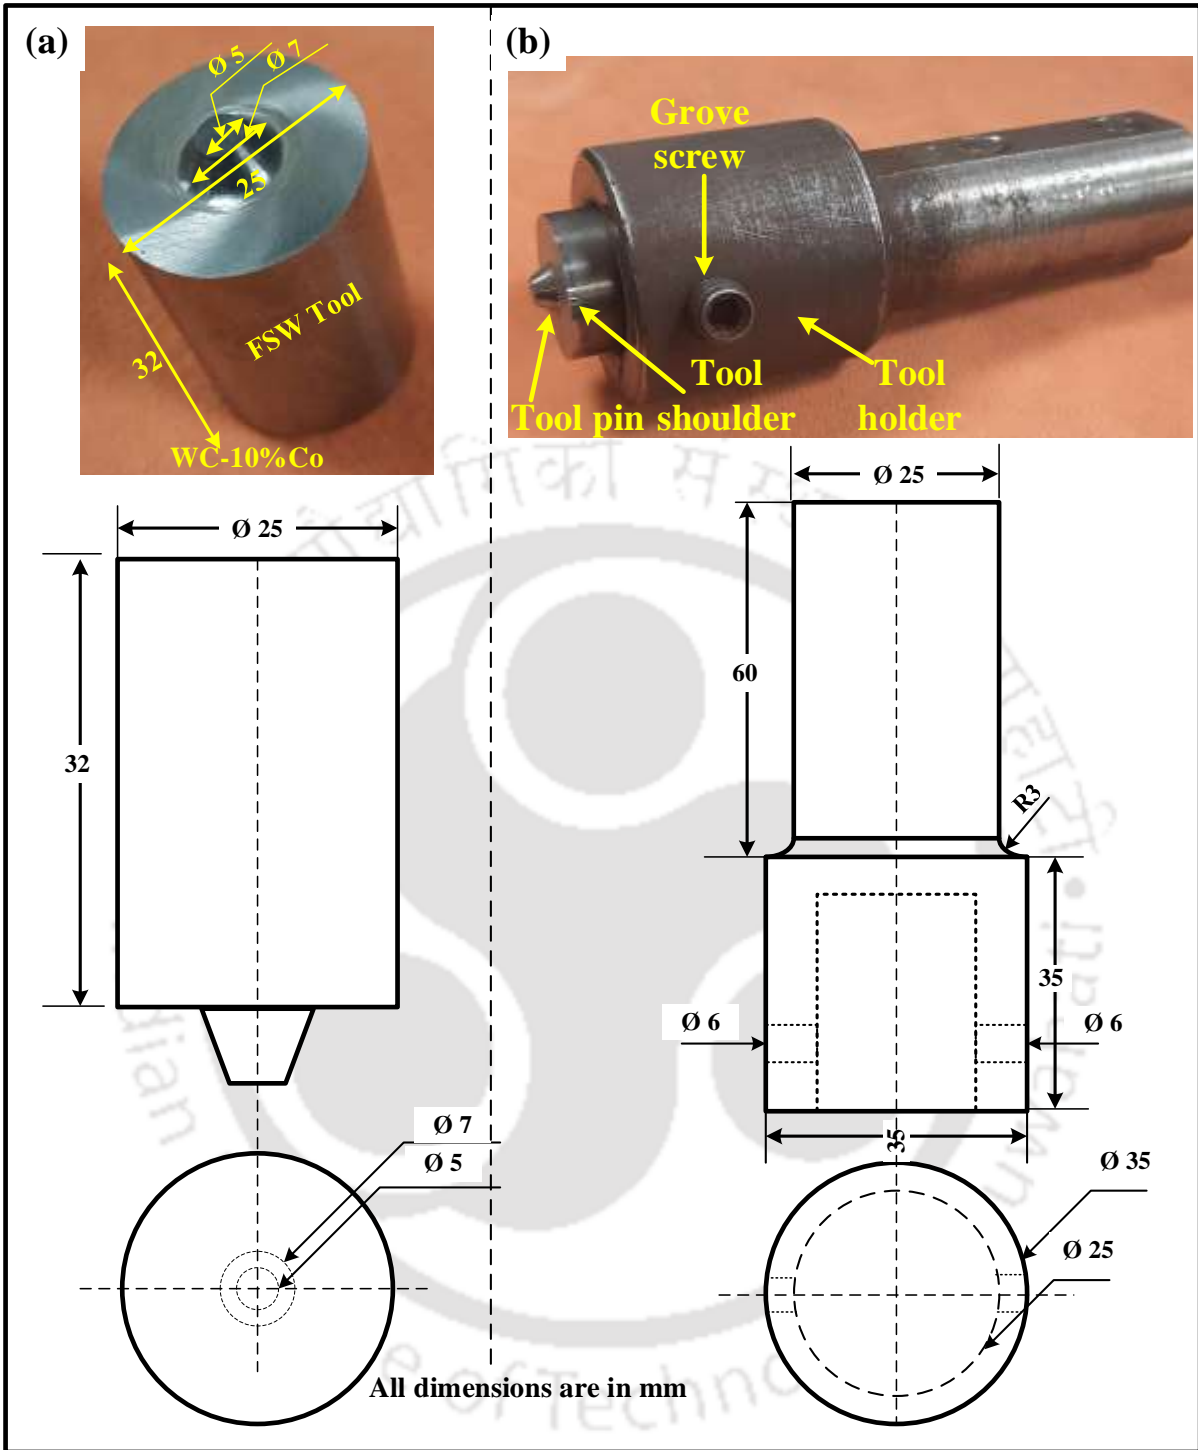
FSW tool dimensions and tool holder dimensions.
